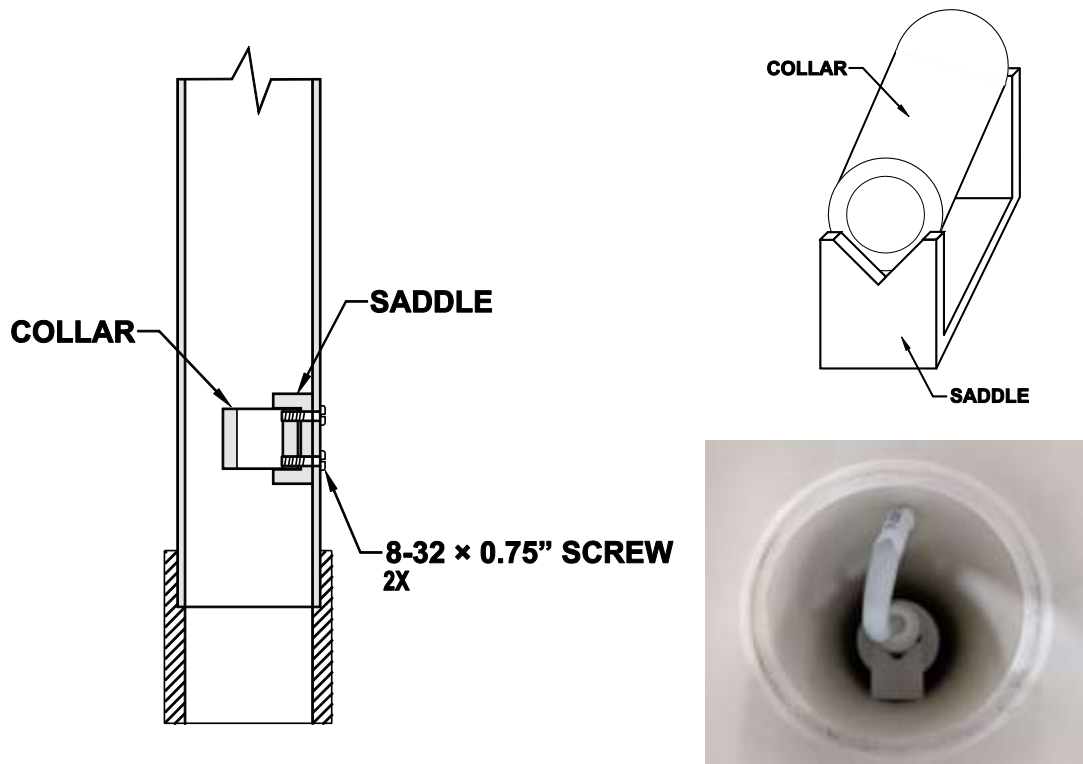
Probe Mounting Collar and Saddle Inside MARS
